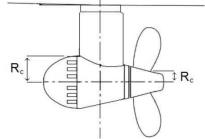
Dimensions used for R_c
